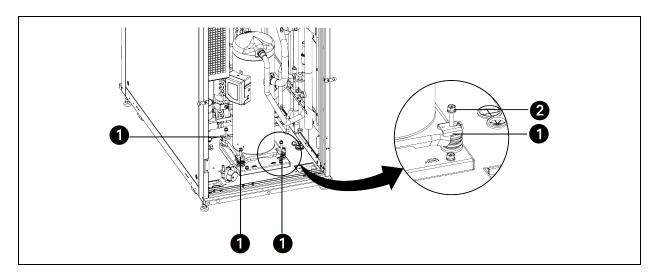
Removing Compressor Fixing Plates for CRD25
